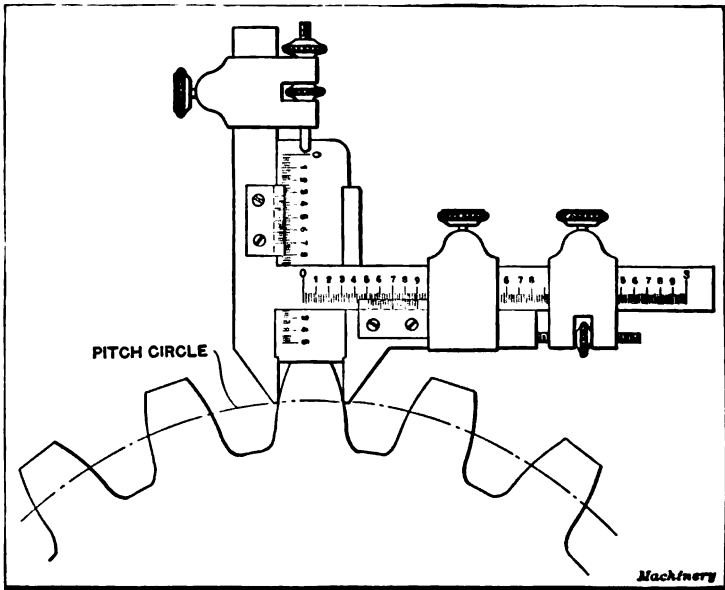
Vernier Caliper for Measuring the Thickness of Gear Tooth at the Pitch Circle
